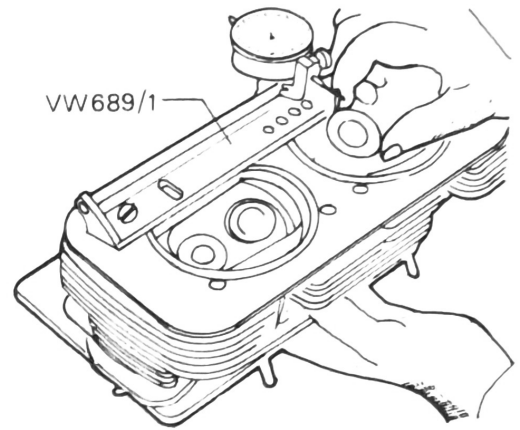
17 A method of checking the wear in the valve guides and valve stems
